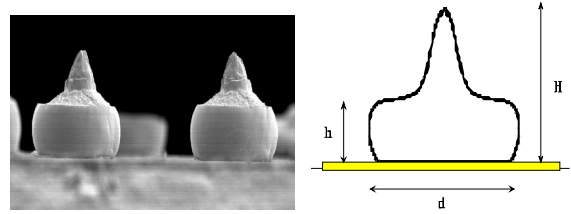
Bump geometry made using 25 μm gold/palladium wire.
